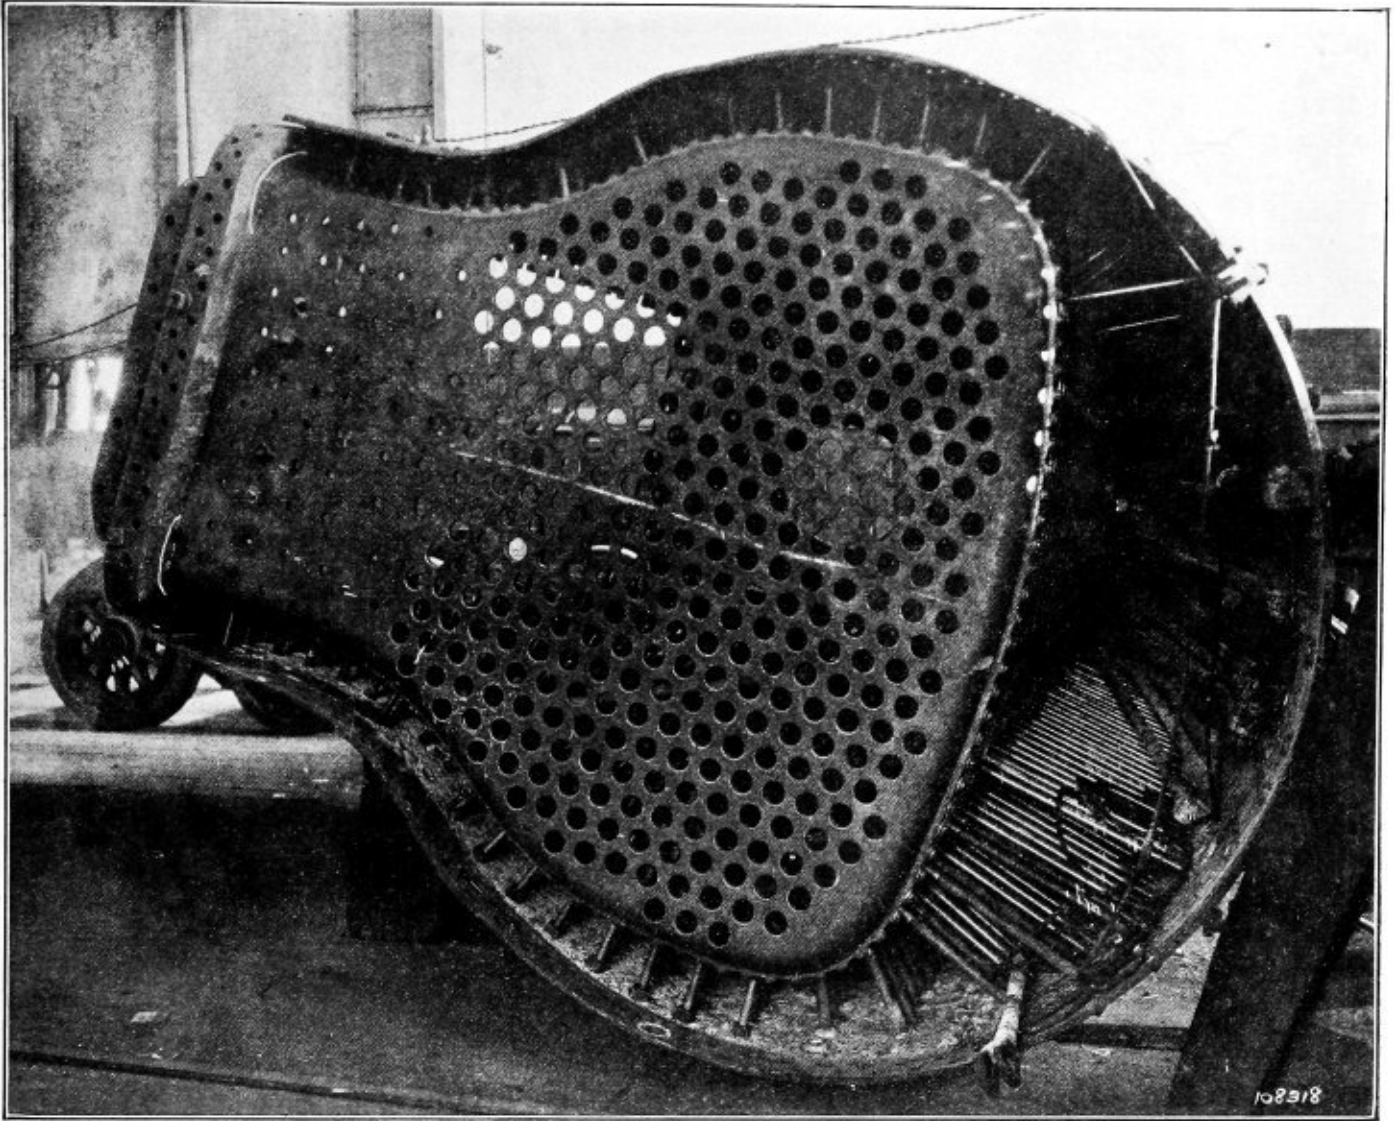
Staybolts Cut Away from Locomotive Boiler Preparatory to Welding by Electric Arc
